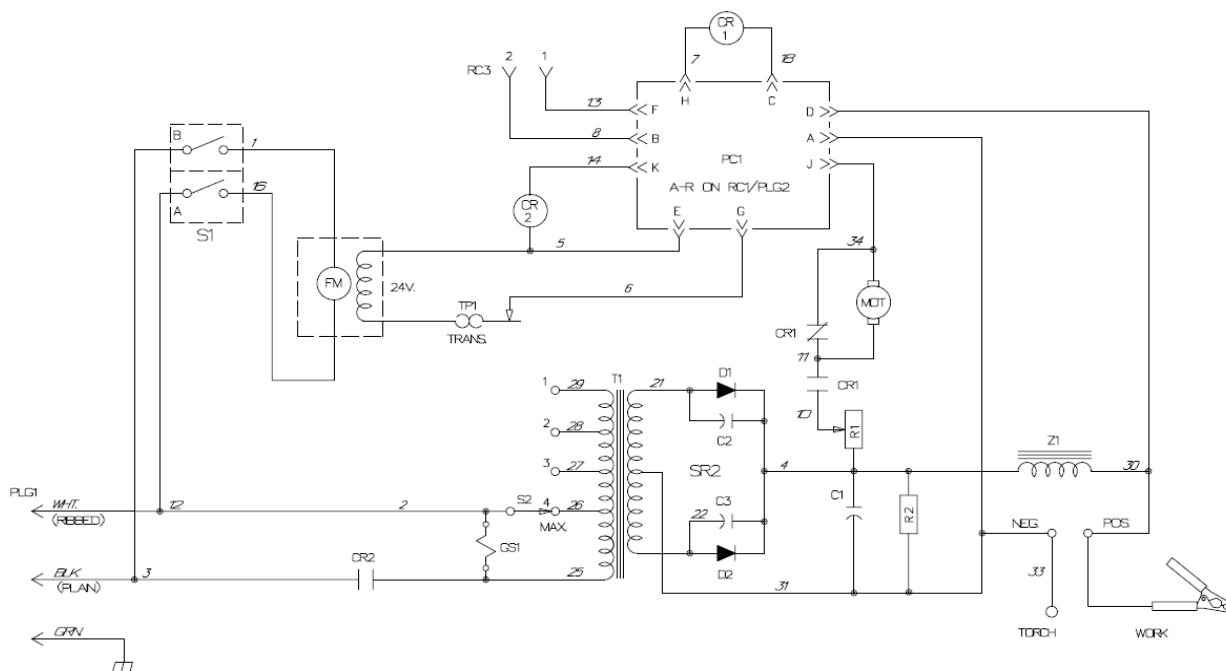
Constant Voltage power supply for MIG welder with multi-tap transformer (T1) and inductive choke (Z1) [6]
